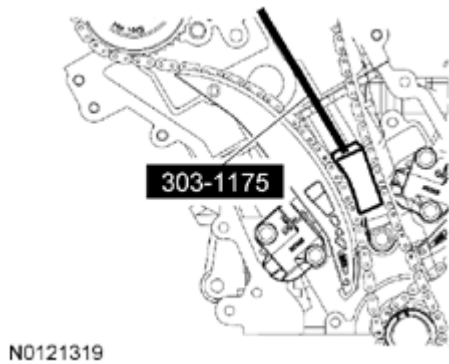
Installing Timing Chain Locking Tool In RH Timing Chain
